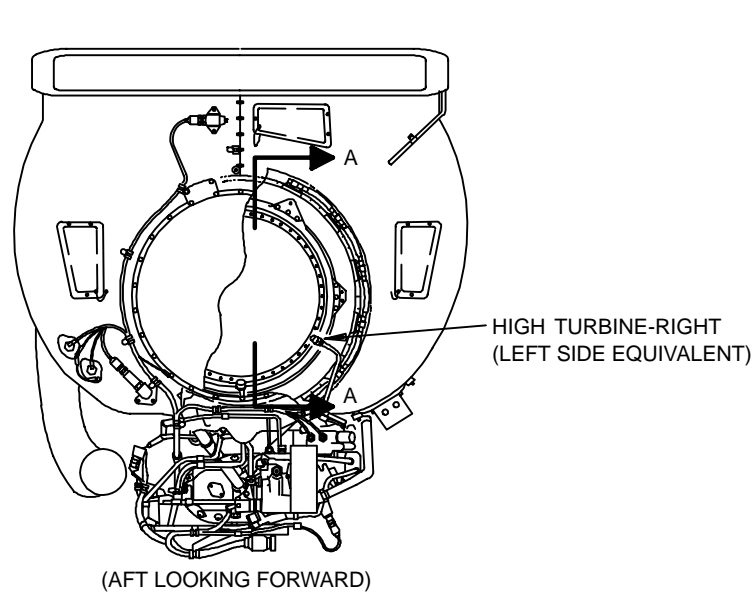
HIGH PRESSURE TURBINE BLADES AND VANE RING BORESCOPE INSPECTION
